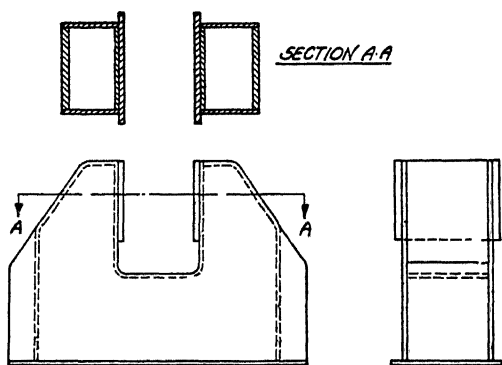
End frame, for a bending roll, having a built-up section of steel plate.
